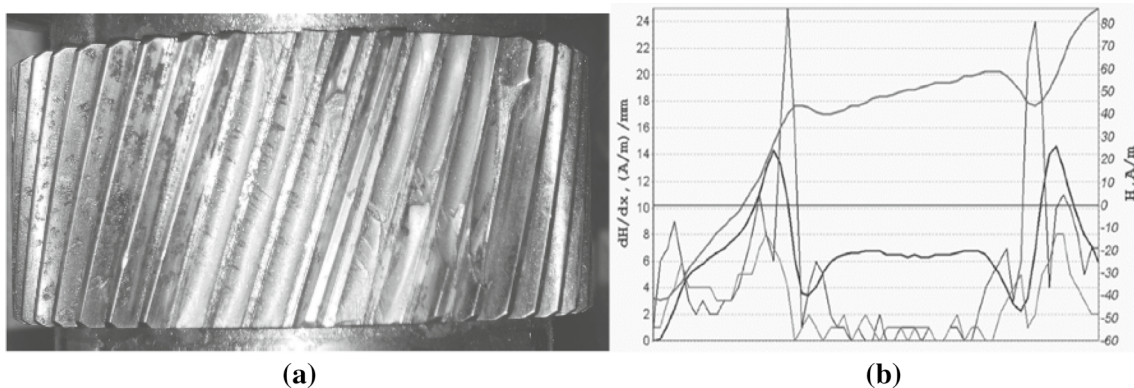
The actual toothed gears after failure (a) and its MMM signal (b) [201], Copyright@2010, Journal of achievements in materials and manufacturing engineering
